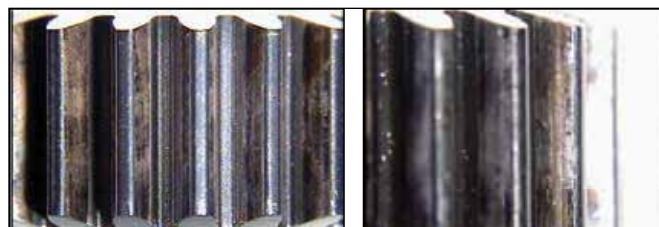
MoS<sub>2</sub> gearbox inspection after life test.
